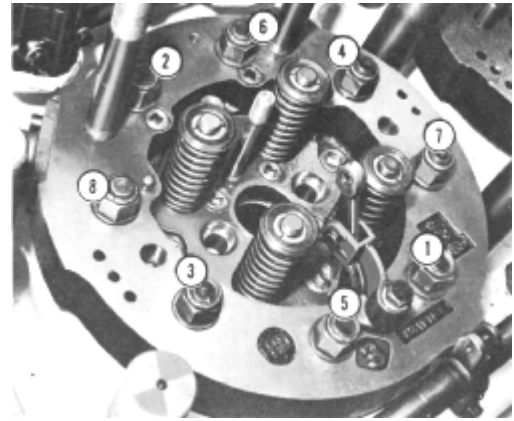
Head-To-Liner Nut Tightening Sequence
